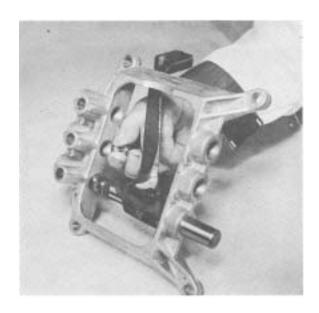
Install two interlock balls between 4th & 5th, and 2nd & 3rd shift rods.
